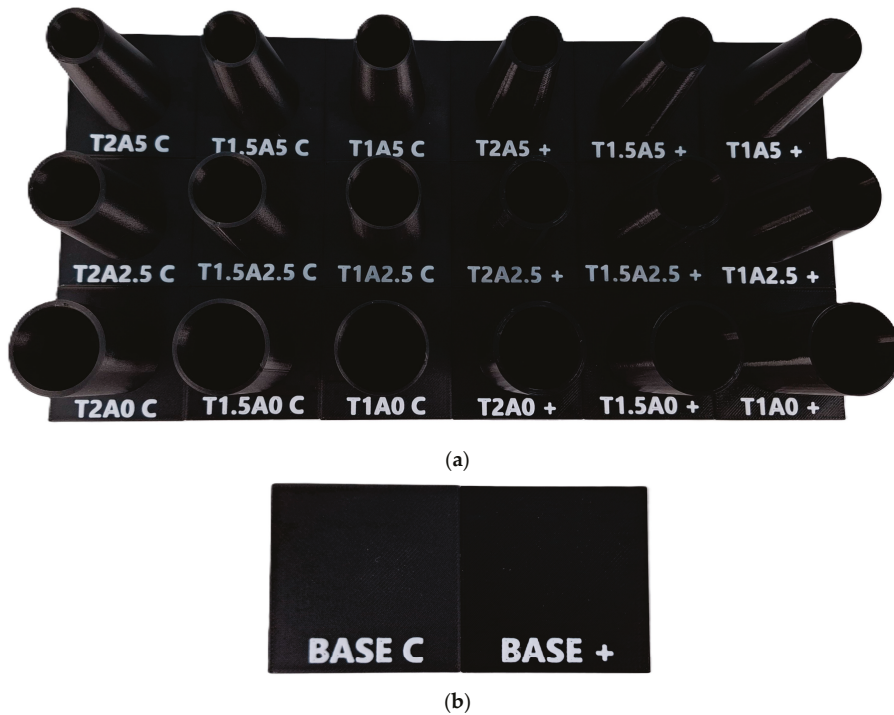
Three-dimensional printed (a) PLA+ and PLA-CF specimens; (b) PLA+ and PLA-CF bases.
